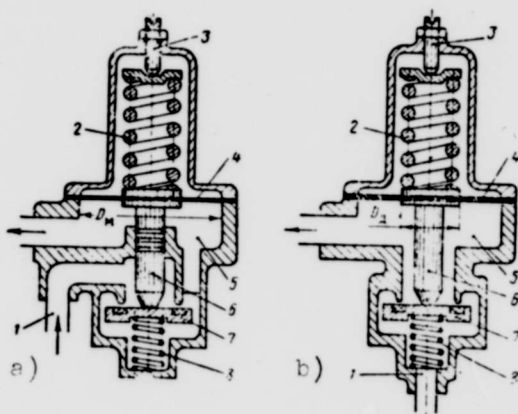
Diagrams of reduction gears: a) direct action; b) reverse action; 1 - inlet channel; 2 - spring; 3 - regulating screw; 4 - diaphragm; 5 - outlet cavity of the reduction gear; 6 - valve rod; 7 - valve; 8 - locking spring.
